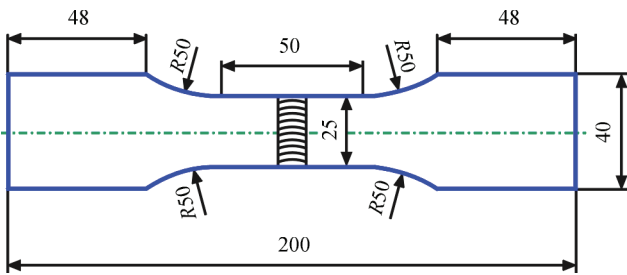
Appearance and geometric sizes of specimen for fatigue tests of butt welded joints
